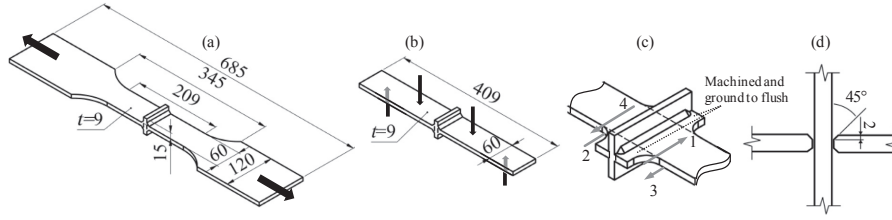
Shape (after removing weld run-on and run-off parts) and dimensions of the test specimens: (a) axially and (b) bending loaded LC joints; (c) sequence of welds and preparation of the specimens; and (d) partial K-groove preparation used in the FWB\_DYN7 and FWB\_DYN8 specimens (all dimensions in mm).
